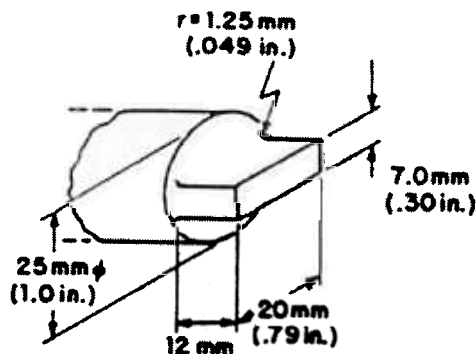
Schematic of one-half of a Brugger impact test specimen. Extended “tab” on cylinder of specimen impacted with hammer (14).
